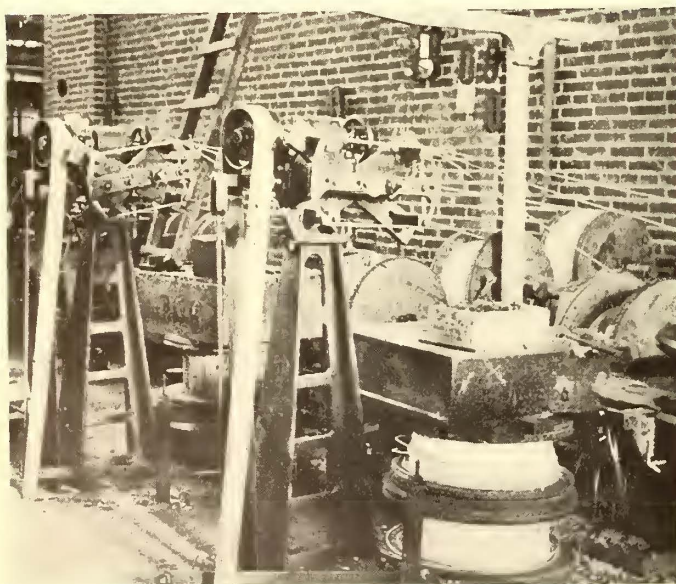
ARMATURE-COIL WINDING MACHINES
